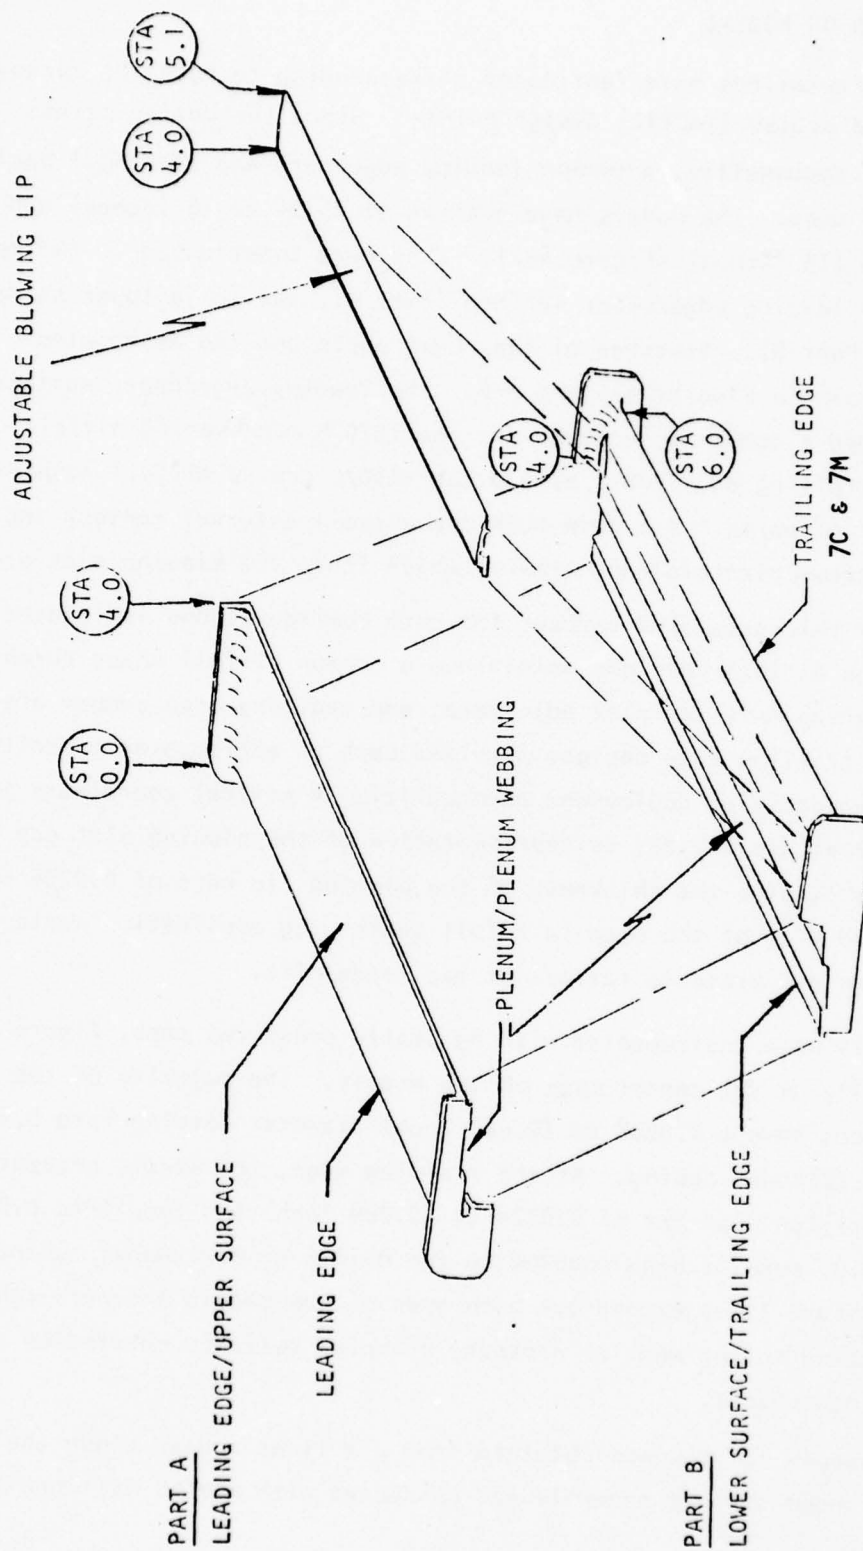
TATC7C, 7M WIND TUNNEL MODEL ASSEMBLY
